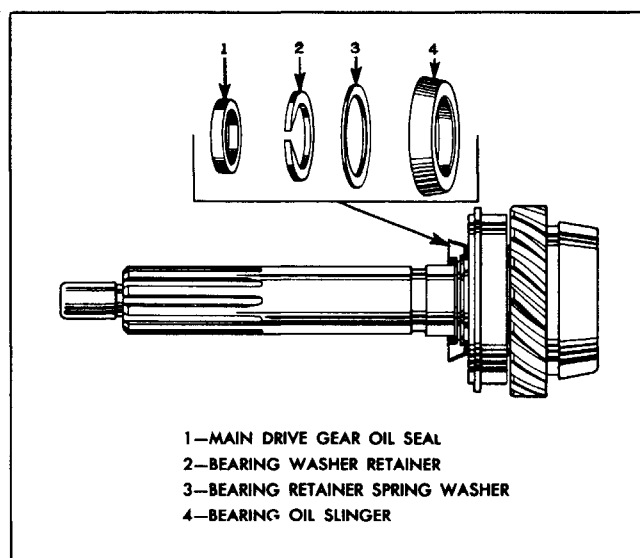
Oil Seal and Oil Slinger on Main Drive Gear
